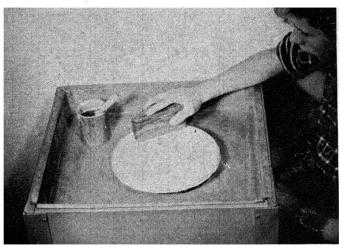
Polishing a book end on a horizontal running canvas-covered disk mounted on a lap unit spindle.
